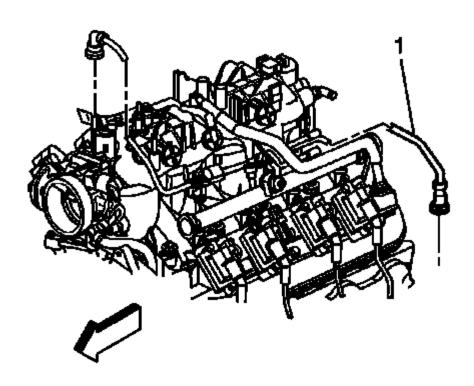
View Of EVAP Purge Solenoid Vent Tube Courtesy of GENERAL MOTORS CORP.
